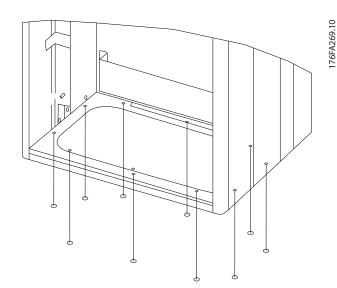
Mounting of Bottom plate, E9 Frame Size
